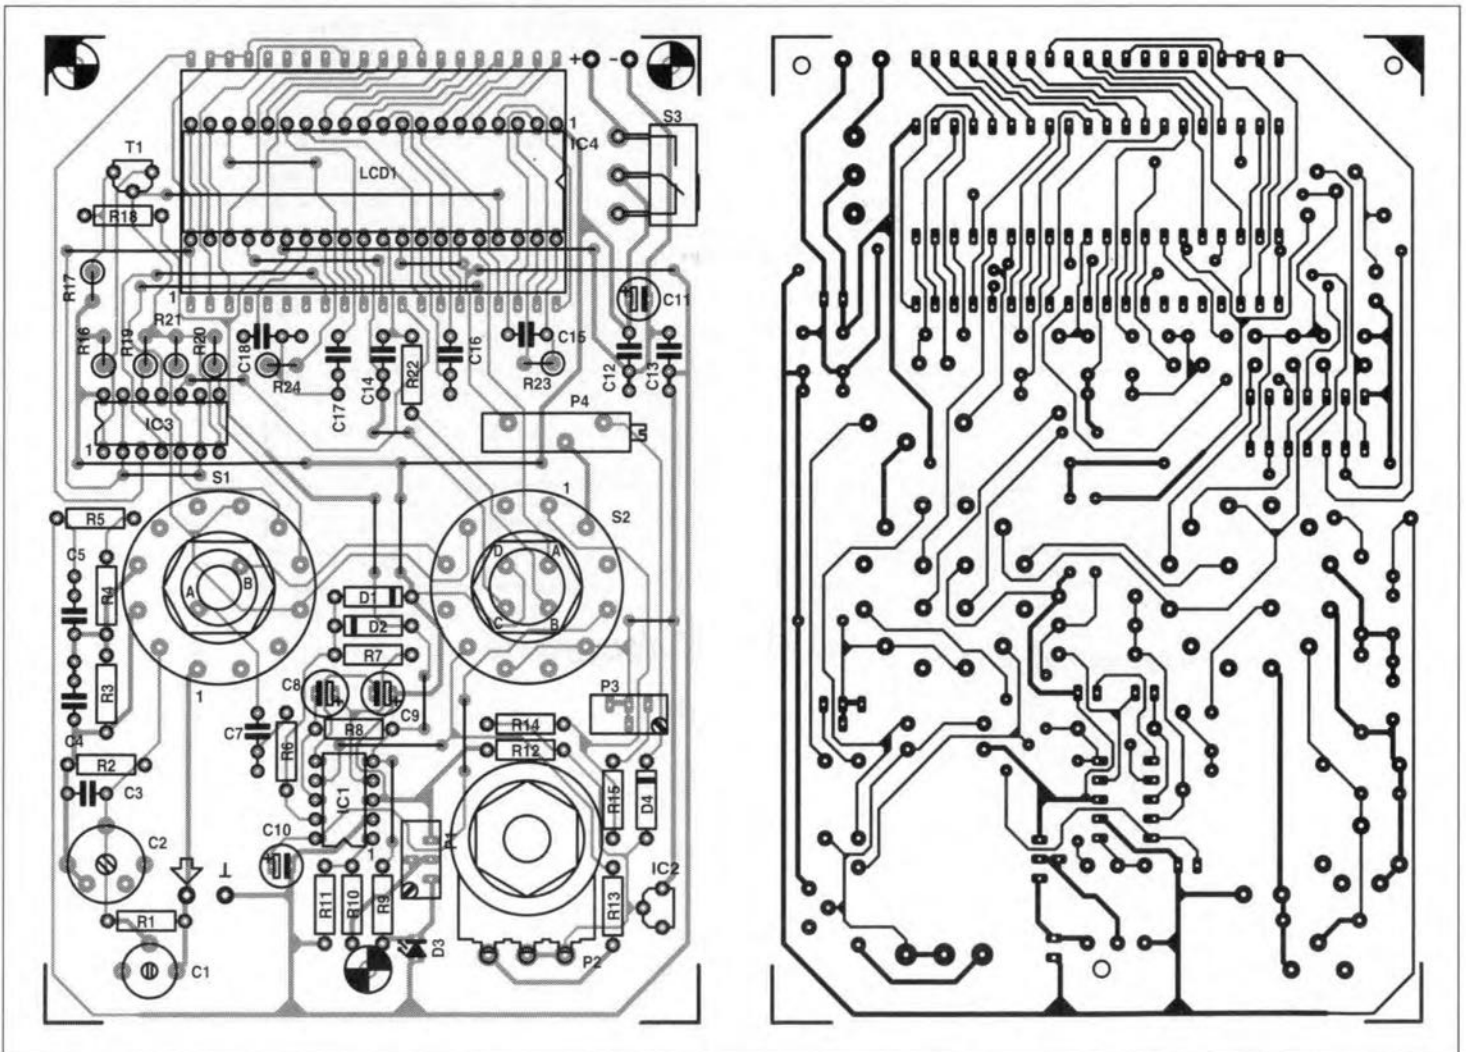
Printed-circuit board for the r.m.s. a.f. voltmeter.
